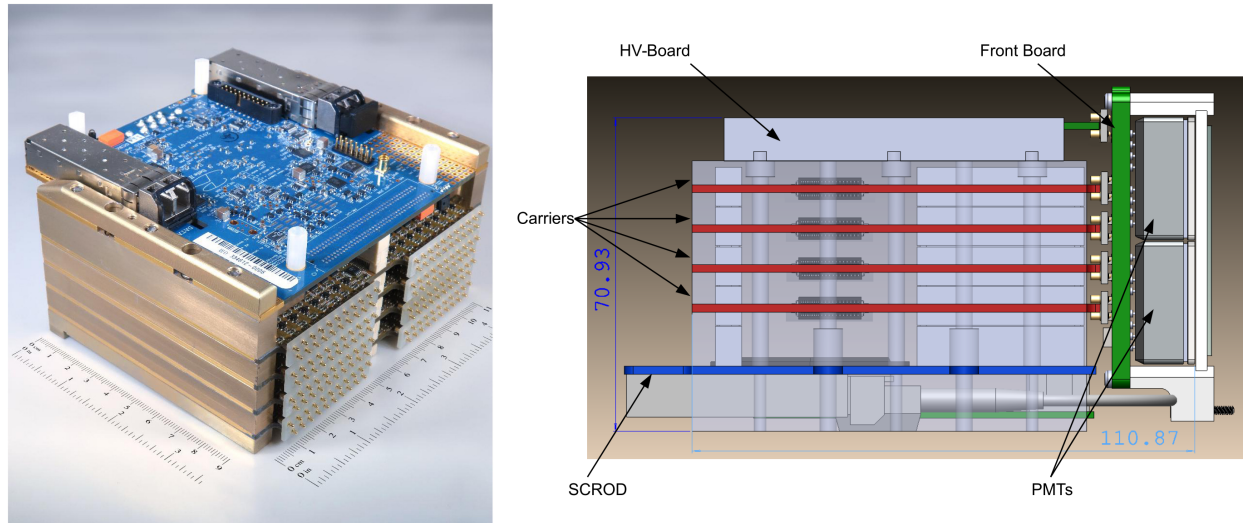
Photograph and a side view schematic mechanical layout of a board stack of the TOP front-end electronics.
